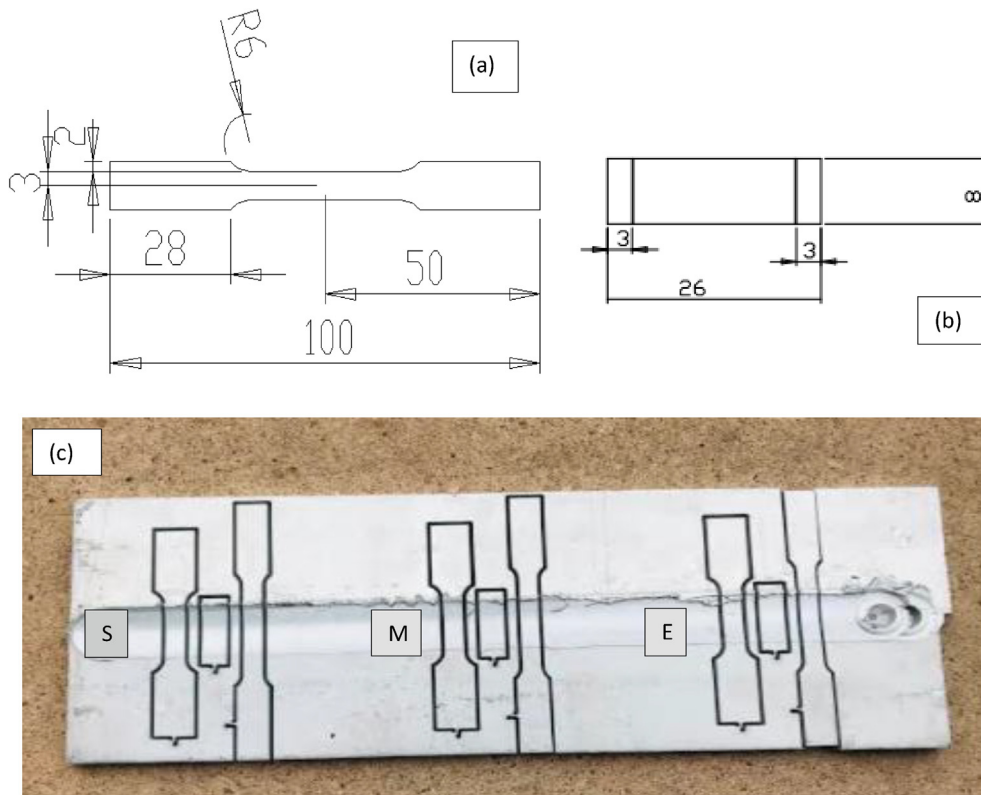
(a) Tensile test specimen, (b) Microhardness specimen (all the dimensions are in mm) and (c) Specimen position.
